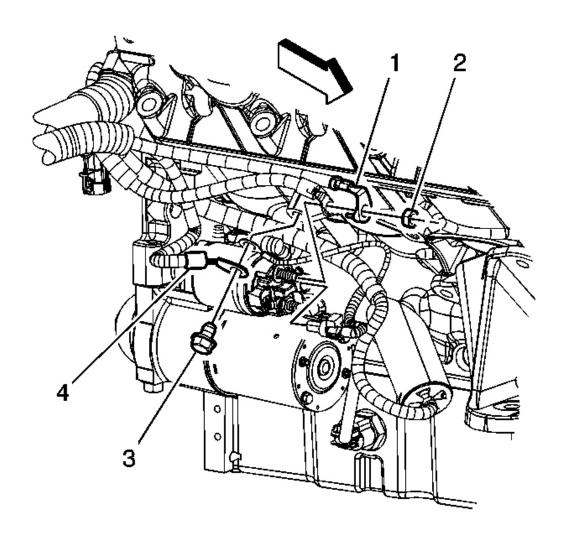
View Of Battery Cables & Bolts Courtesy of GENERAL MOTORS CORP.
